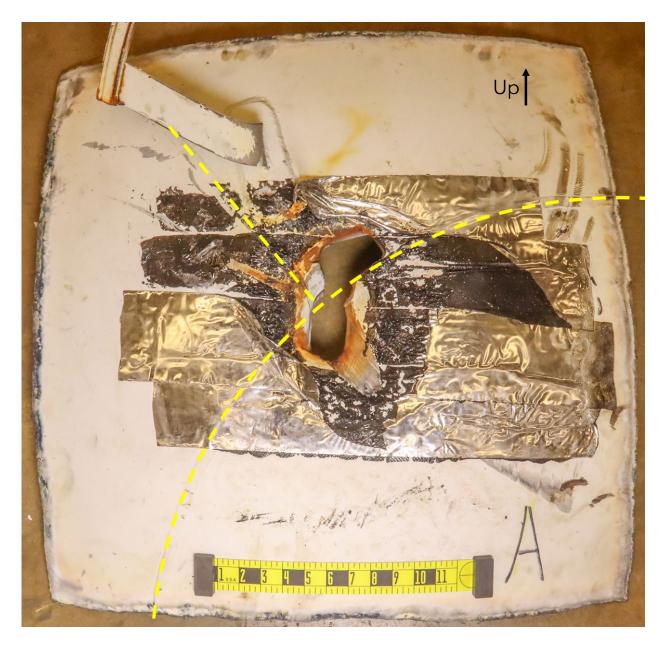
View of the external side of head shell piece A, which contains the perforation. The dashed yellow lines show the approximate paths of the butt weld deposits. Segments 1, 6, and the cap are identified. The perforation occurred where the segment 1-6 and cap butt welds meet.
